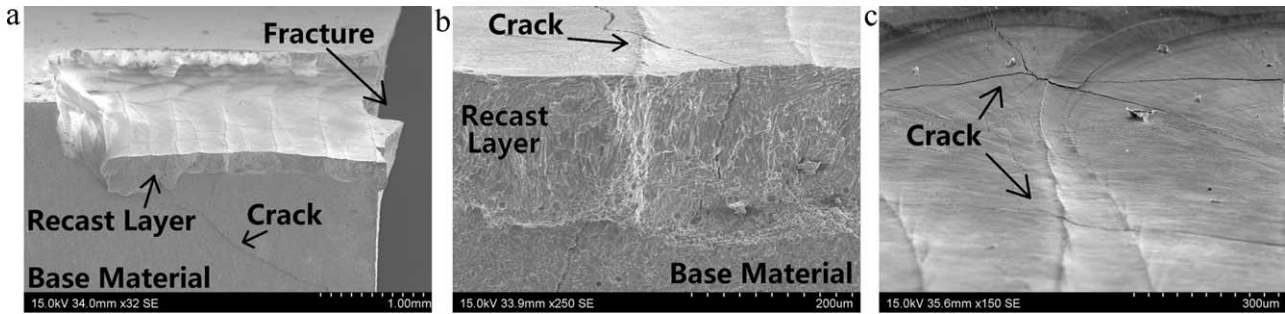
The SEM micrographs of CO₂ laser machined alumina cavity in air. (a) An overview of the cavity cross-section, (b) a close-up view of the recast layer cross-section on the bottom of the cavity and (c) a close-up view of the recast layer surface on the bottom of the cavity.
